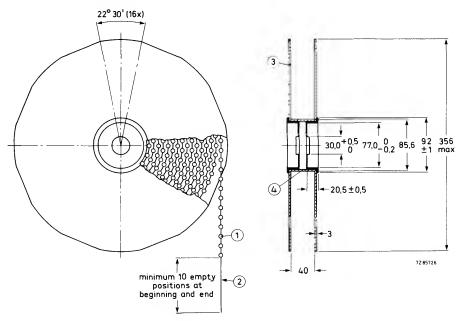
Reel dimensions (mm) for radial-taped diodes.
